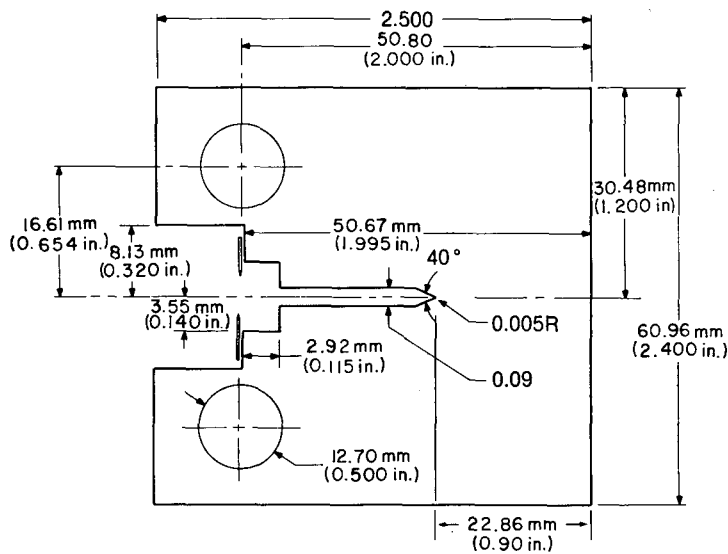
Geometry of a 1T compact specimen for an a/W of 0.6. In this program, however, a slightly shorter crack length ($a/W = 0.5$) has been used, as shown in Fig. 1. A precrack of 2.54 mm (0.100 in.) is added prior to testing.
